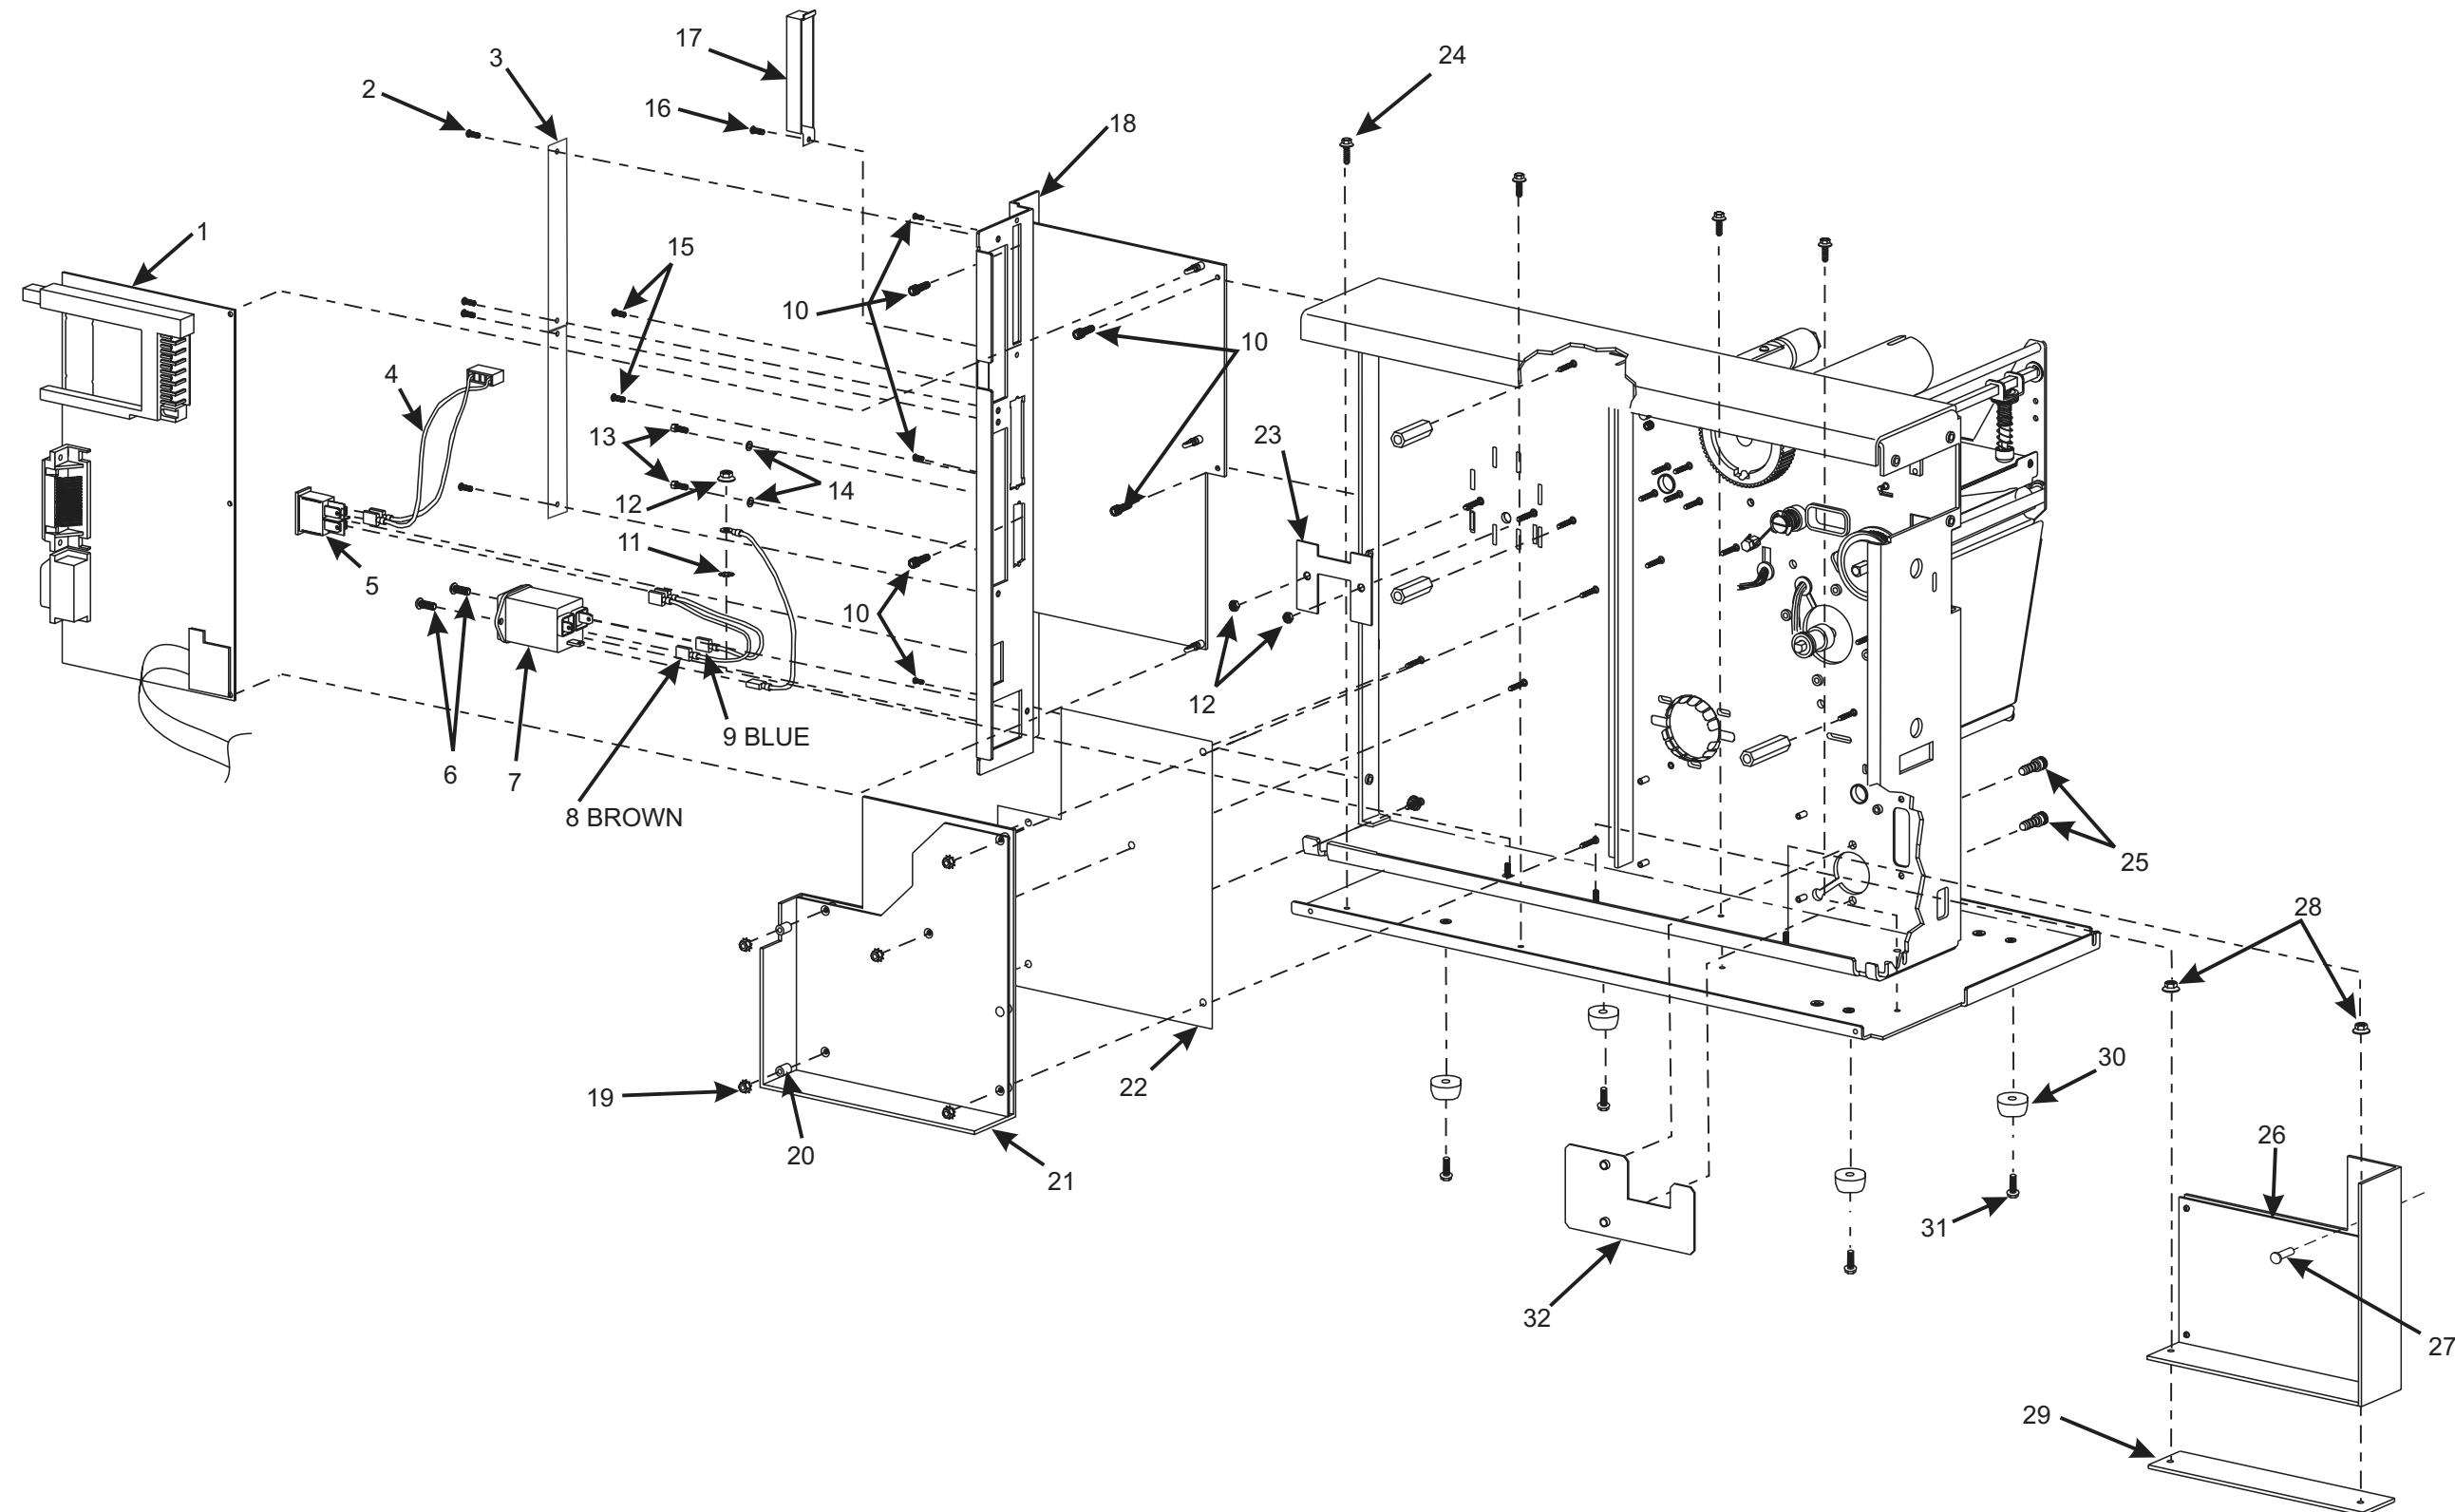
Final Assembly (View 3) for Configuration Numbers 10500-0XXX-XXXX and 10500-1XXX-XXXX
